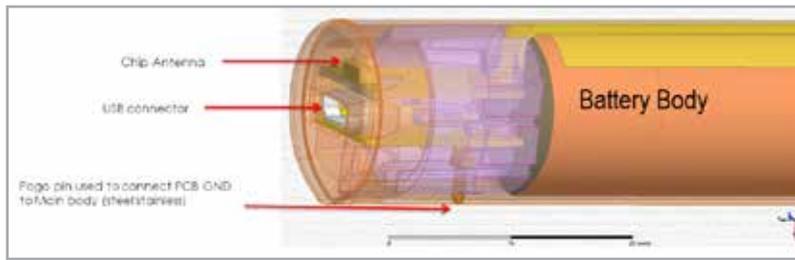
A 3D design of the final device including electronic PCBA and mechanical parts.
